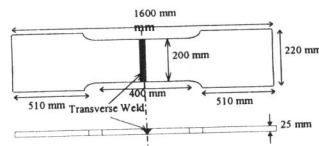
schematic of a 25 mm thick plate with transverse butt weld
